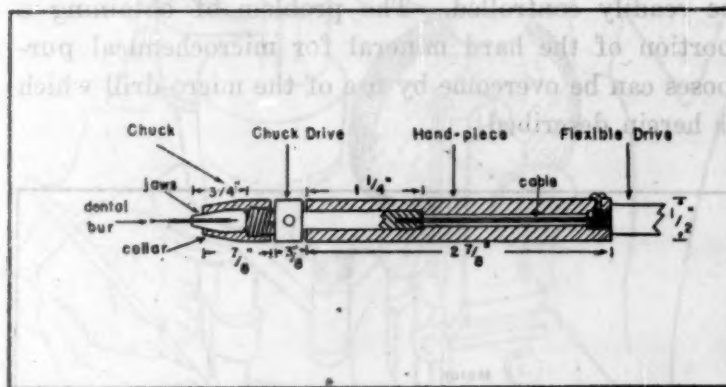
Chuck and hand-piece. Section showing detail of chuck construction, chuck drive assembly and method of anchoring flexible drive.
